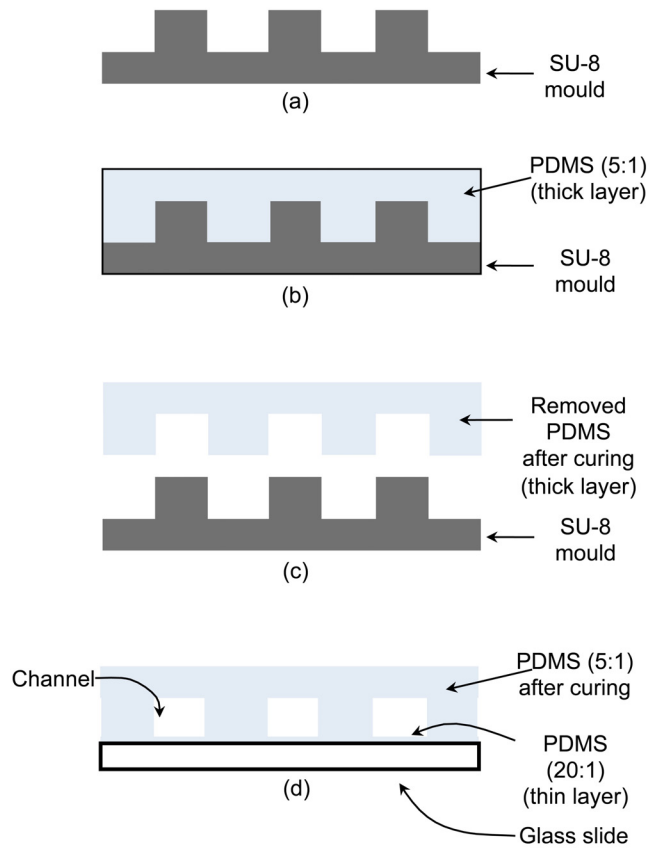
PDMS device fabrication procedure. (a) Cross-section of the SU-8 mould with a positive relief. (b) The mixture of oligomer and curing agent is poured onto the SU-8 mould (thick layer) and placed in the oven to cure for 20 minutes. (c) After curing, the PDMS thick layer is removed from the SU-8 mould and access ports are created. (d) The PDMS layer containing the channel structure is bonded to the glass slide covered with a thin layer of PDMS and placed in the oven to further seal the channel.
